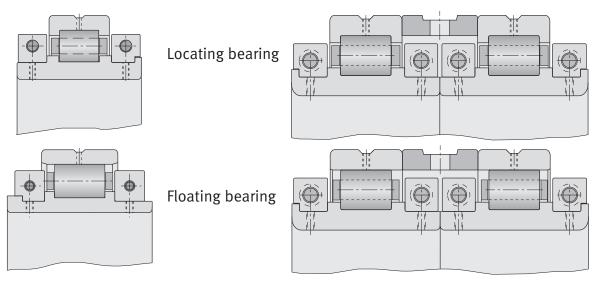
Split single and double row FAG cylindrical roller bearings for drive shafts
